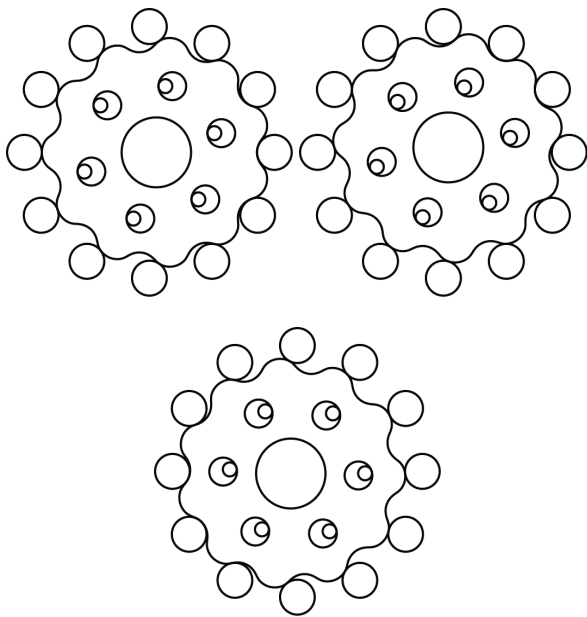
Resulting assembly drawing for Drive 1 at input shaft angles 0° , 45° and 198°
